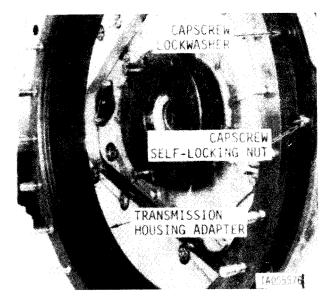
Removing or installing transmission housing adapter, model AVDS-1790-2DR engine.
